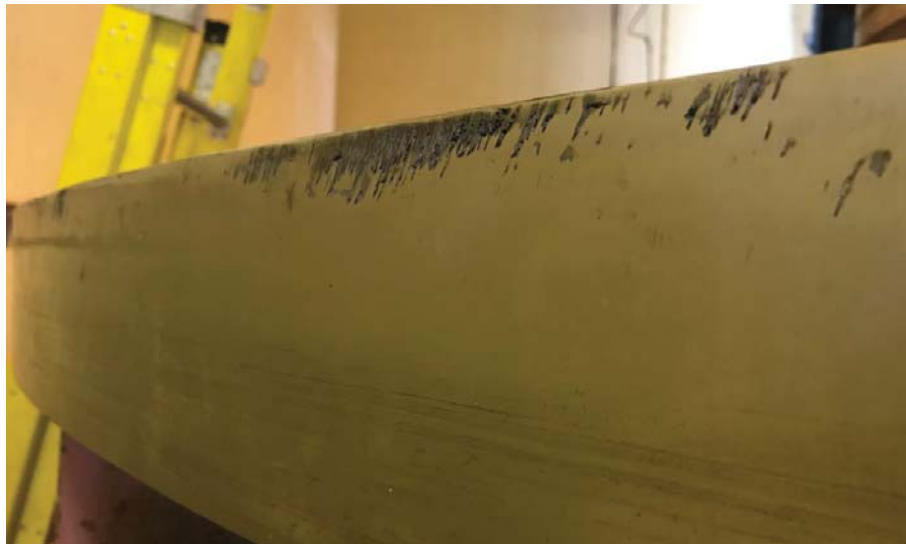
Runner Upper Wearing Ring, Cavitation Damage
